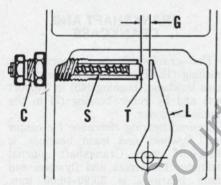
View of torque control screw. Refer to text for adjustment.
